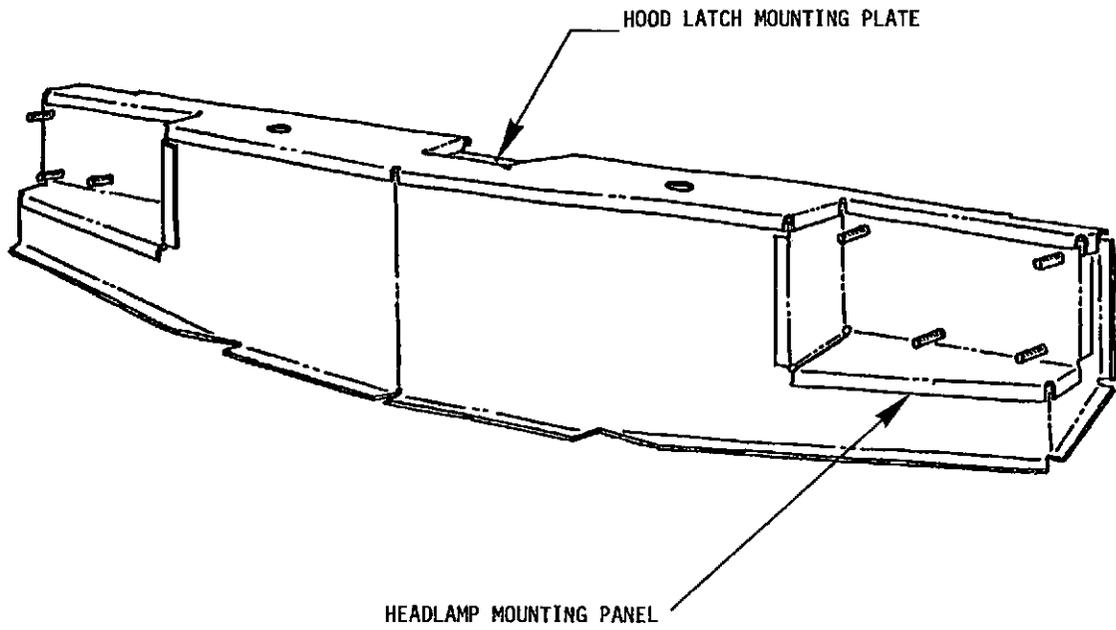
FRONT IMPACT BEAM WELDMENT
